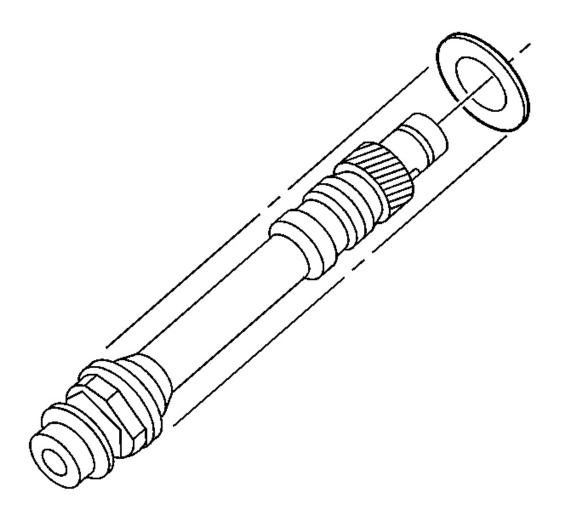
Oil Pump Drive Shaft & Gasket Courtesy of GENERAL MOTORS CORP.
